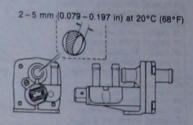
Checking the auxiliary air valve operation (Sec 31)
